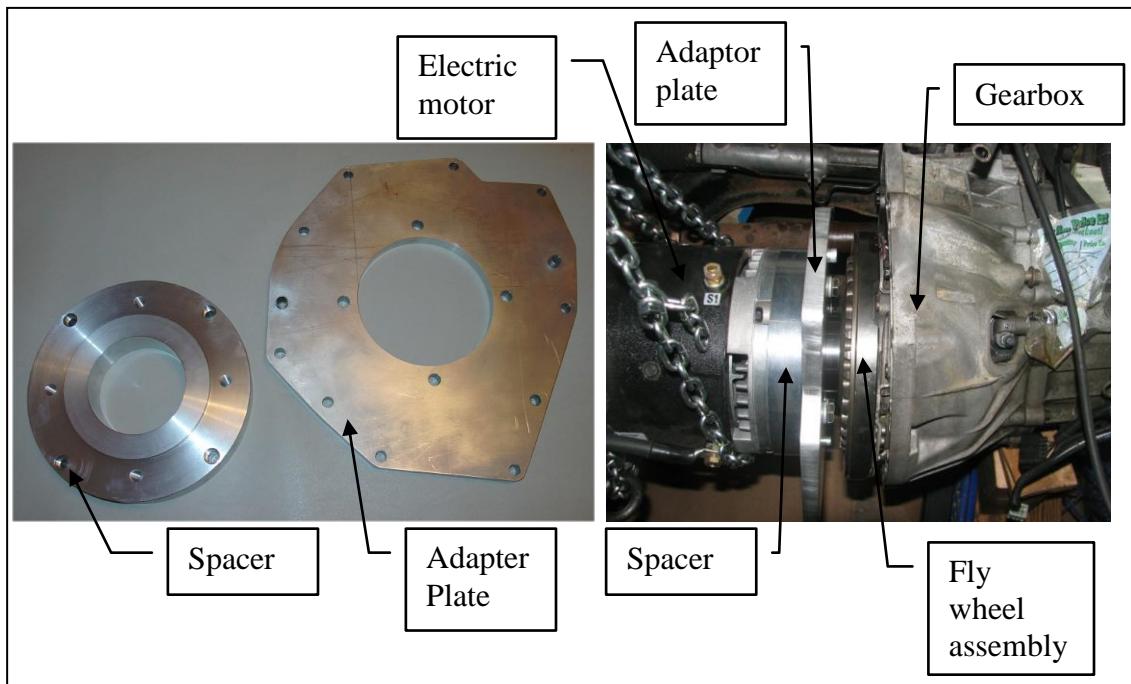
Example of front support motor mounts and a complete assembly with gearbox and electric motor (Simon Family 2008)
